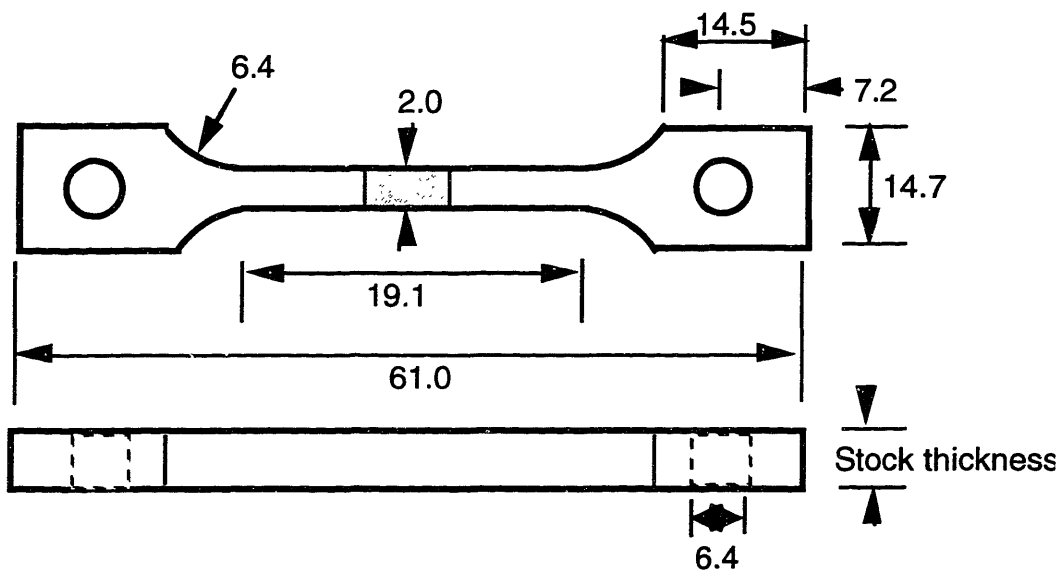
Standard size tensile specimen (dimensions are in millimeter).
